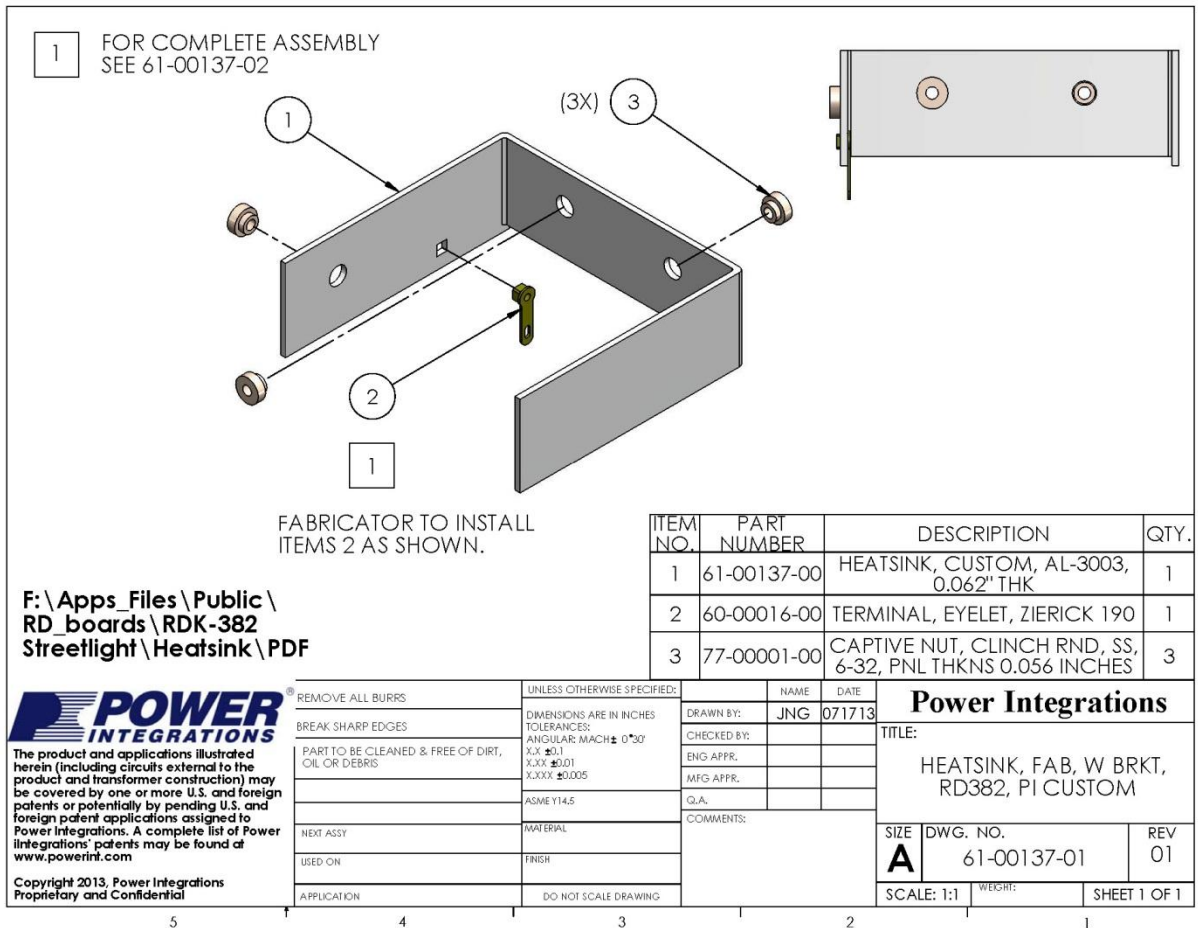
Finished Primary Heat Sink Drawing with Installed Fasteners.
